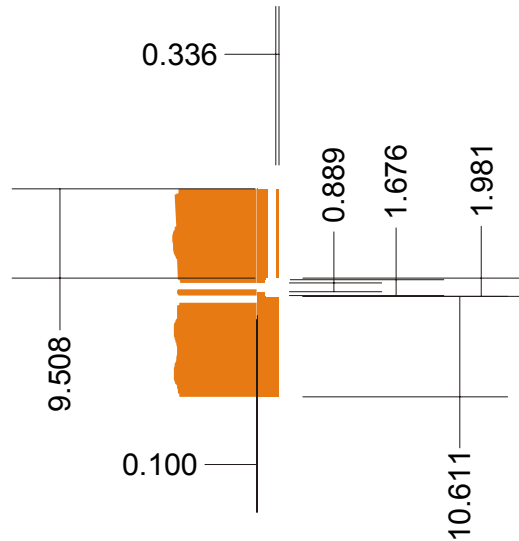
K connector assembly for the Ka band dual mode filter (side view)
